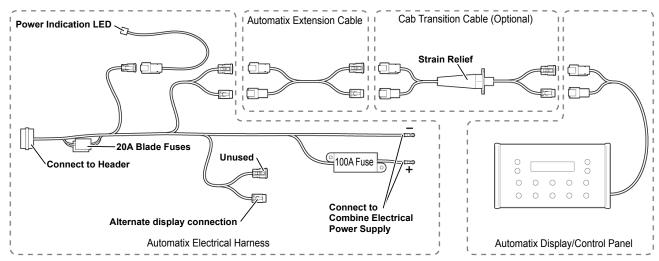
Automatix Control Panel & Electrical Harnesses
